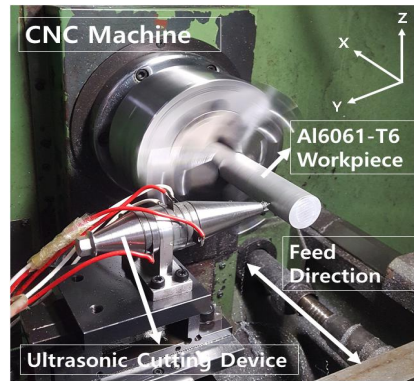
CNC Machine(DC-2 Daegu Heavy Inc. Co.)
